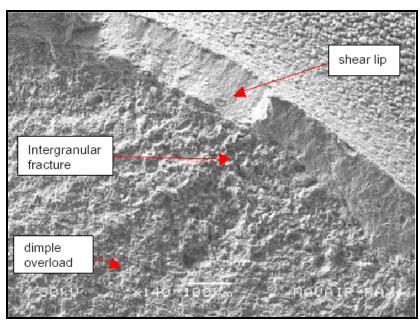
Fracture Surface of Brush Zn-Ni Bar That Failed at 16.9 Hours and 75% NFS
